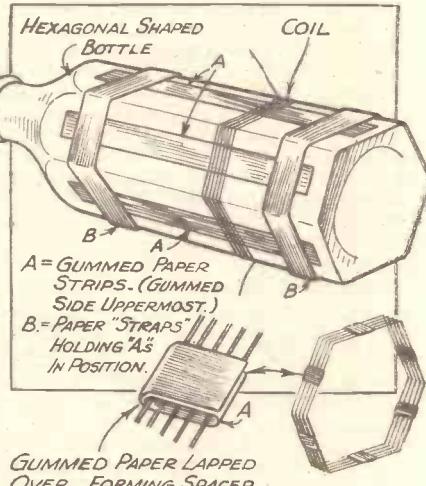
Using a bottle upon which to wind the coils. The diagram is fully explanatory.
